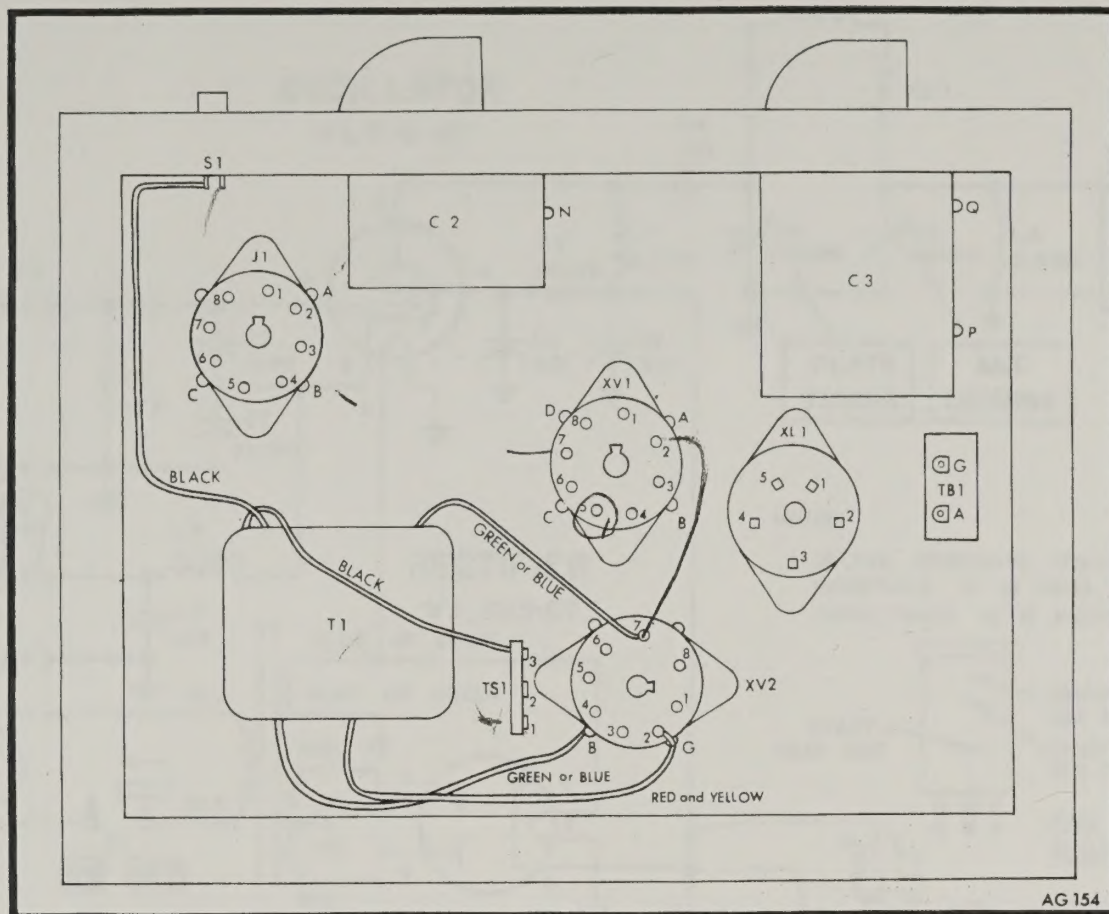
OUTLINE DRAWING - BOTTOM VIEW
